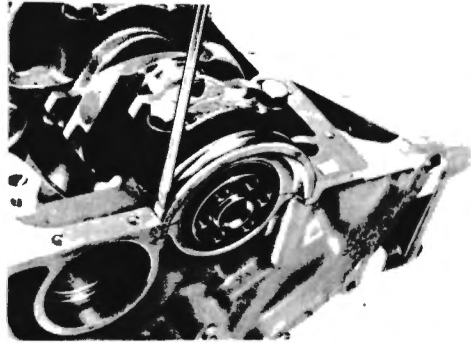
Installing the wedge-shaped seals in the rear main bearing cap.
